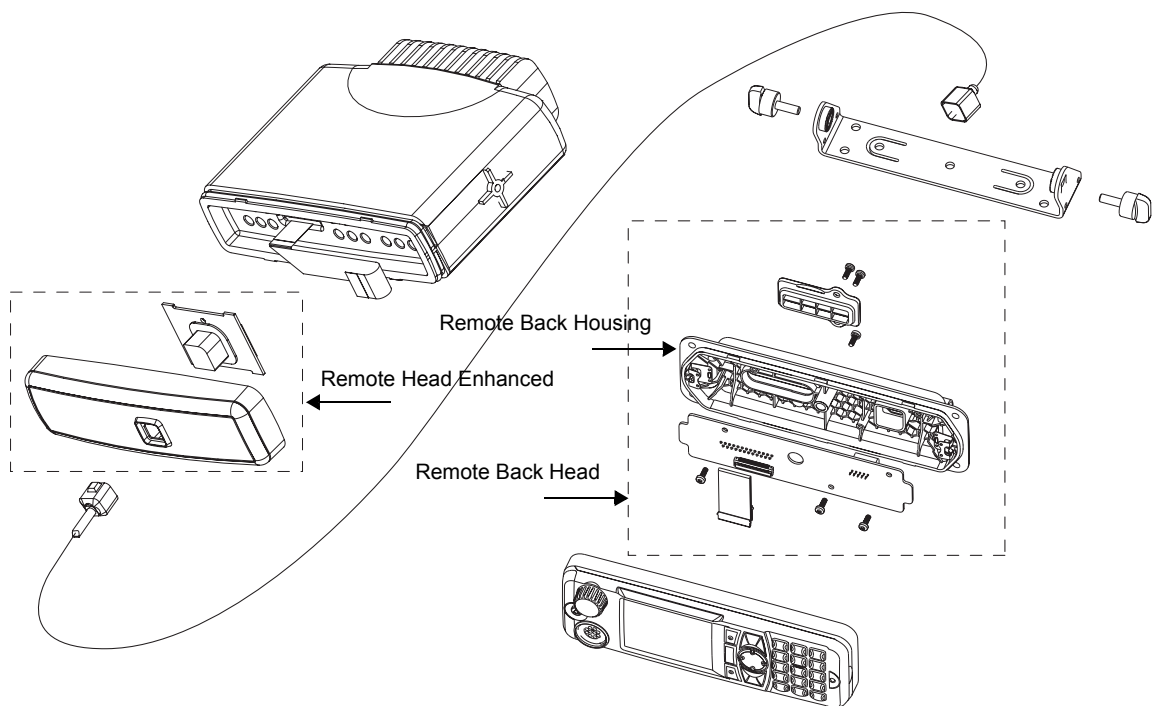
Remote Mount Enhanced Control Head with Remote Head Enhanced
